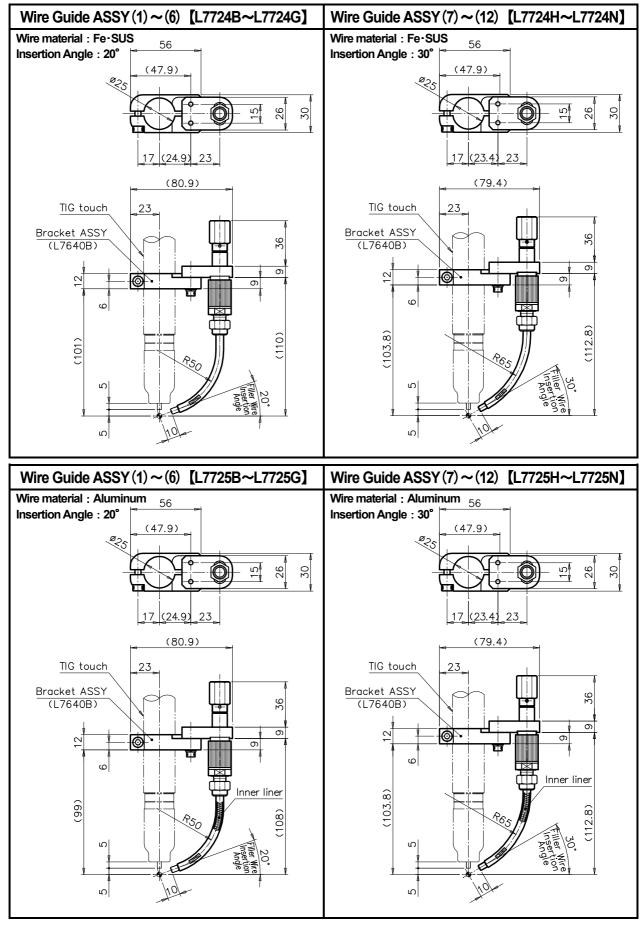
Outline Drawing of Wire Guide (Fe · SUS)/Wire Guide (AL) Unit (mm)
